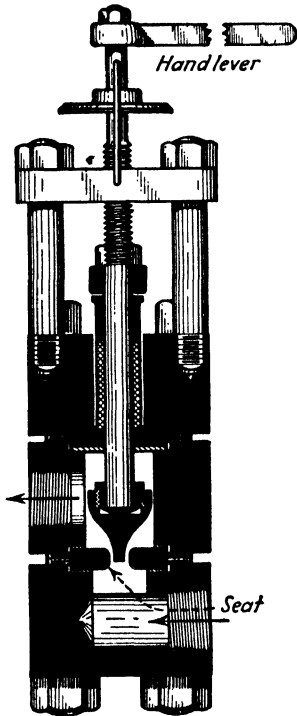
Needle valve used for continuous boiler blowdown service. Seat is reversible. (Courtesy of Strong, Carlisle & Hammond.)
